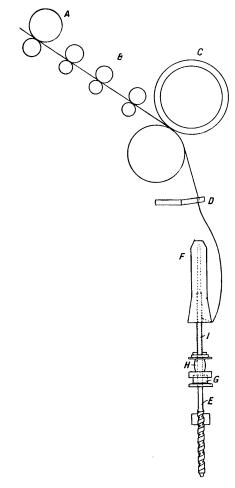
Cap Spinning Frame.—A, back rollers; B, carriers; C, front rollers; D, eyelet board; E, spindle fixed in framework; F, cap supported by spindle; G, bearing for tube I; H, wharl round which driving tape passes; I, tube upon which bobbin or spool is fixed and carried round.
